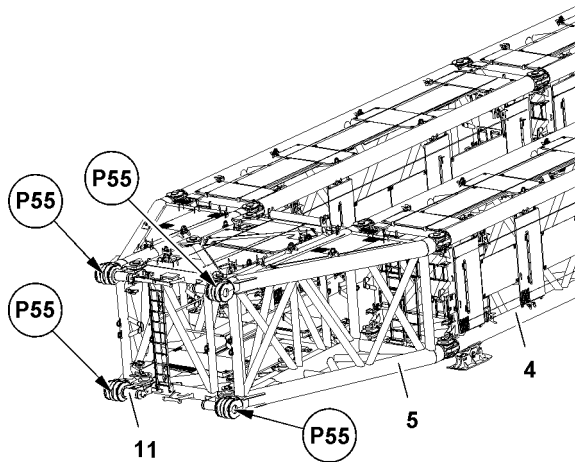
Assembling the S-intermediate sections / S-adapter / S-end section on the upper P-adapter — Pin points
